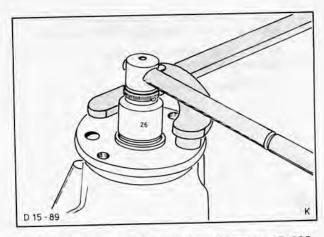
Hold drive pinion flange with special tool no. 15-030
